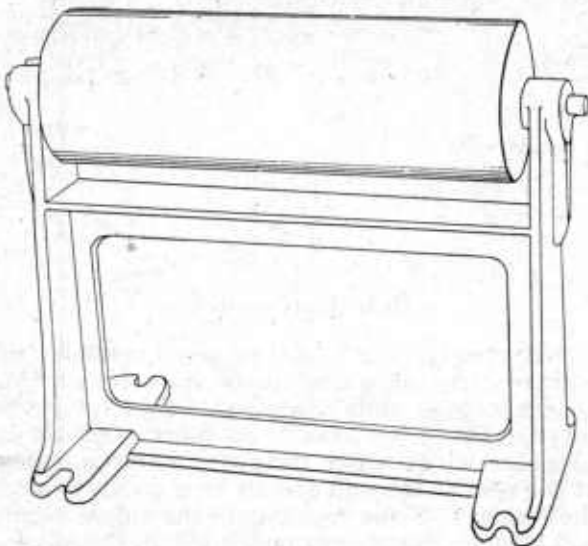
Single dead roll used to support material when mill has no edger.
